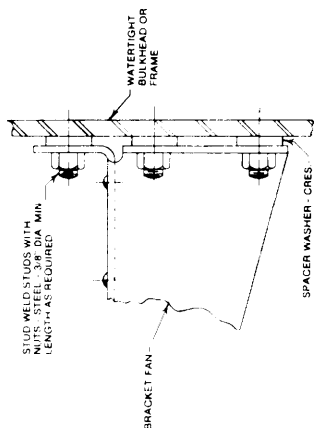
A2. Equipment mounted on insulated watertight steel deck or bulkhead.
